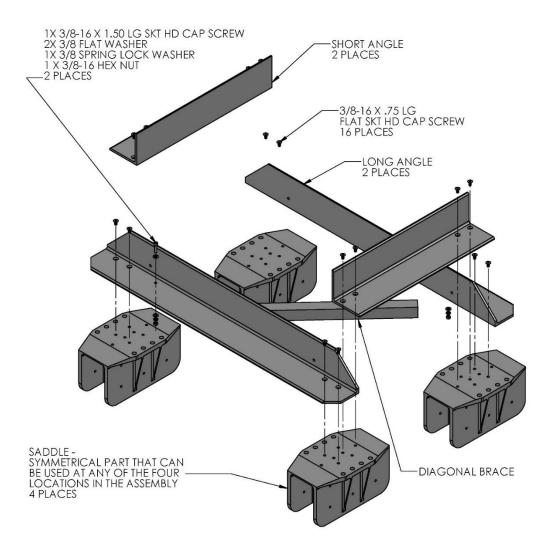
EXPLODED VIEW OF SADDLE INSTALLATION FIXTURE
